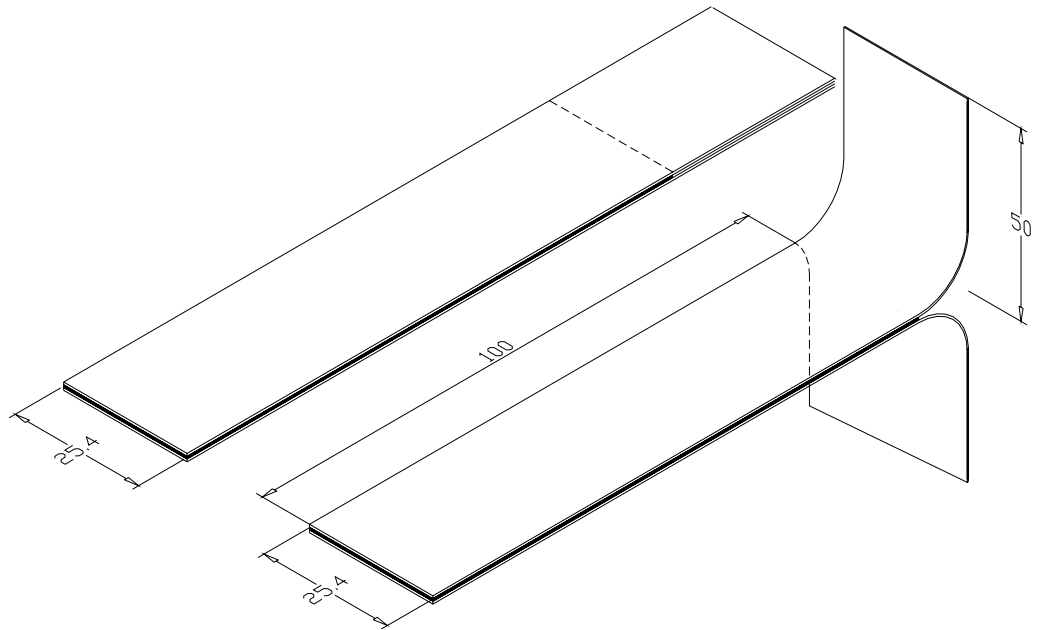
The geometry of specimen for T-Peel test. Unit: mm.
